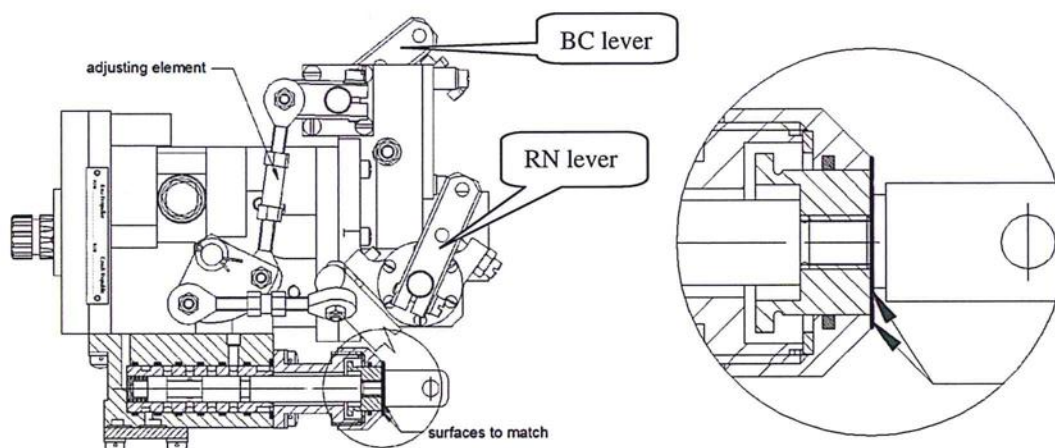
Beta Valve Adjustment by Matching of Surfaces
